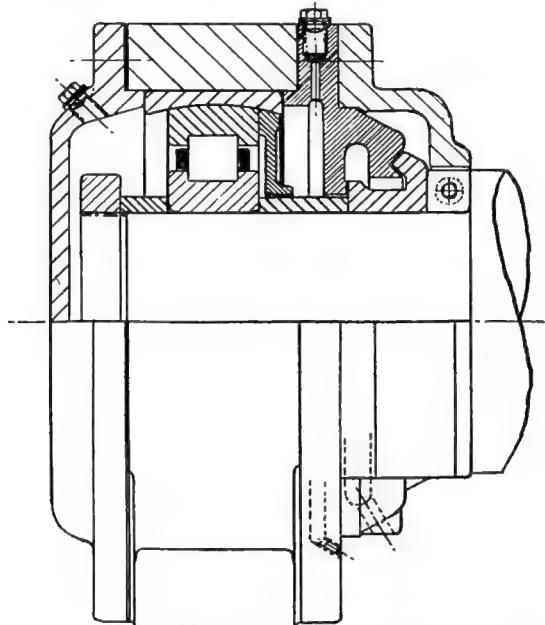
Method of Protecting Roller Bearings on Grinding Roll.
